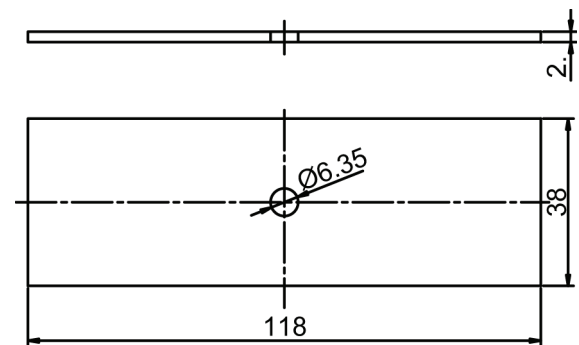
Configuration of open hole QIL specimens for compressive fatigue tests
